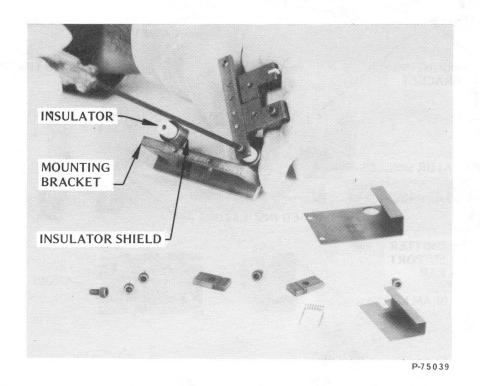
Remove the filament block and mounting bar from the high voltage spacer insulators. Remove the insulators, insulator shields, and mounting bracket from the emitter support bar.
